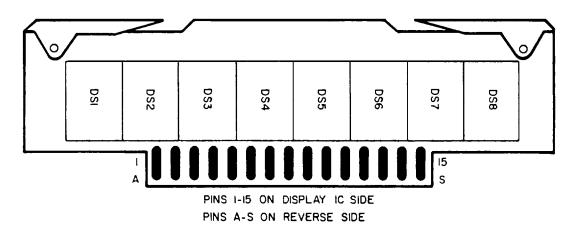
B. A1A2, Counter Display Board Assembly, Components (CHANGE 9)
